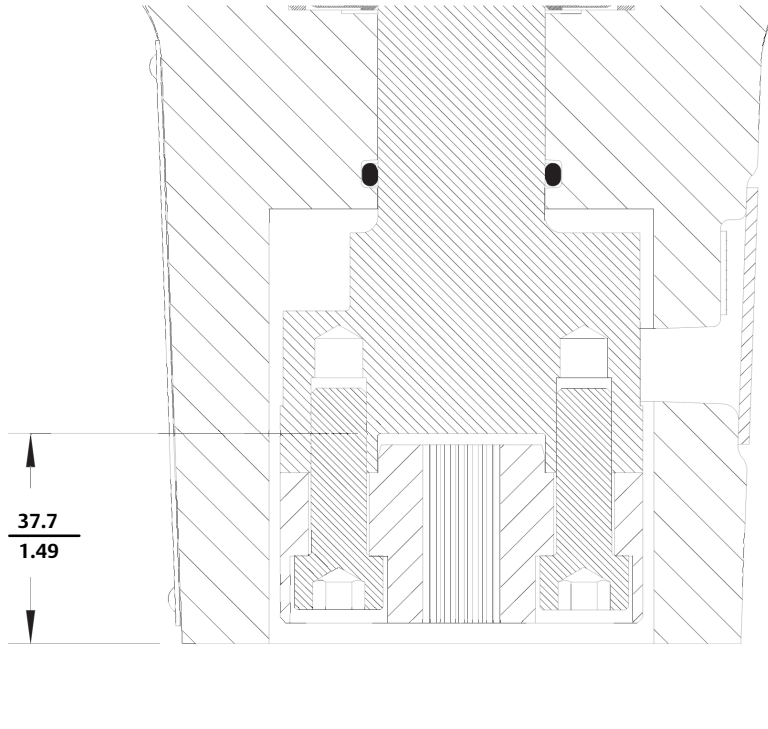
Fisher easy-Drive 200R Actuator Dimensions
